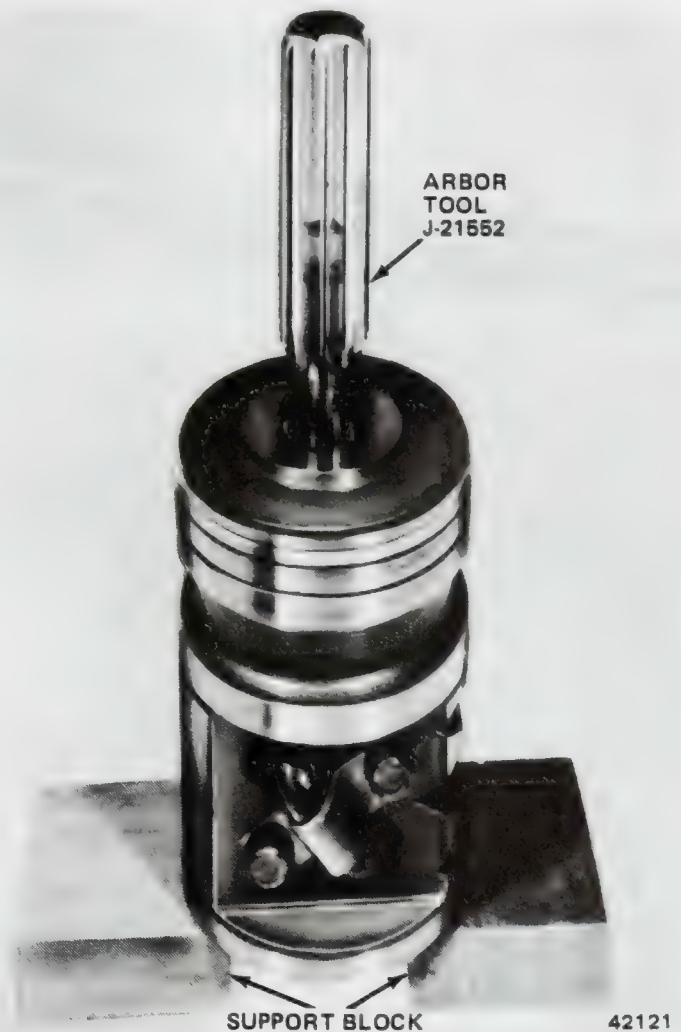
K-32 Arbor Tool Installed In Rack Piston
